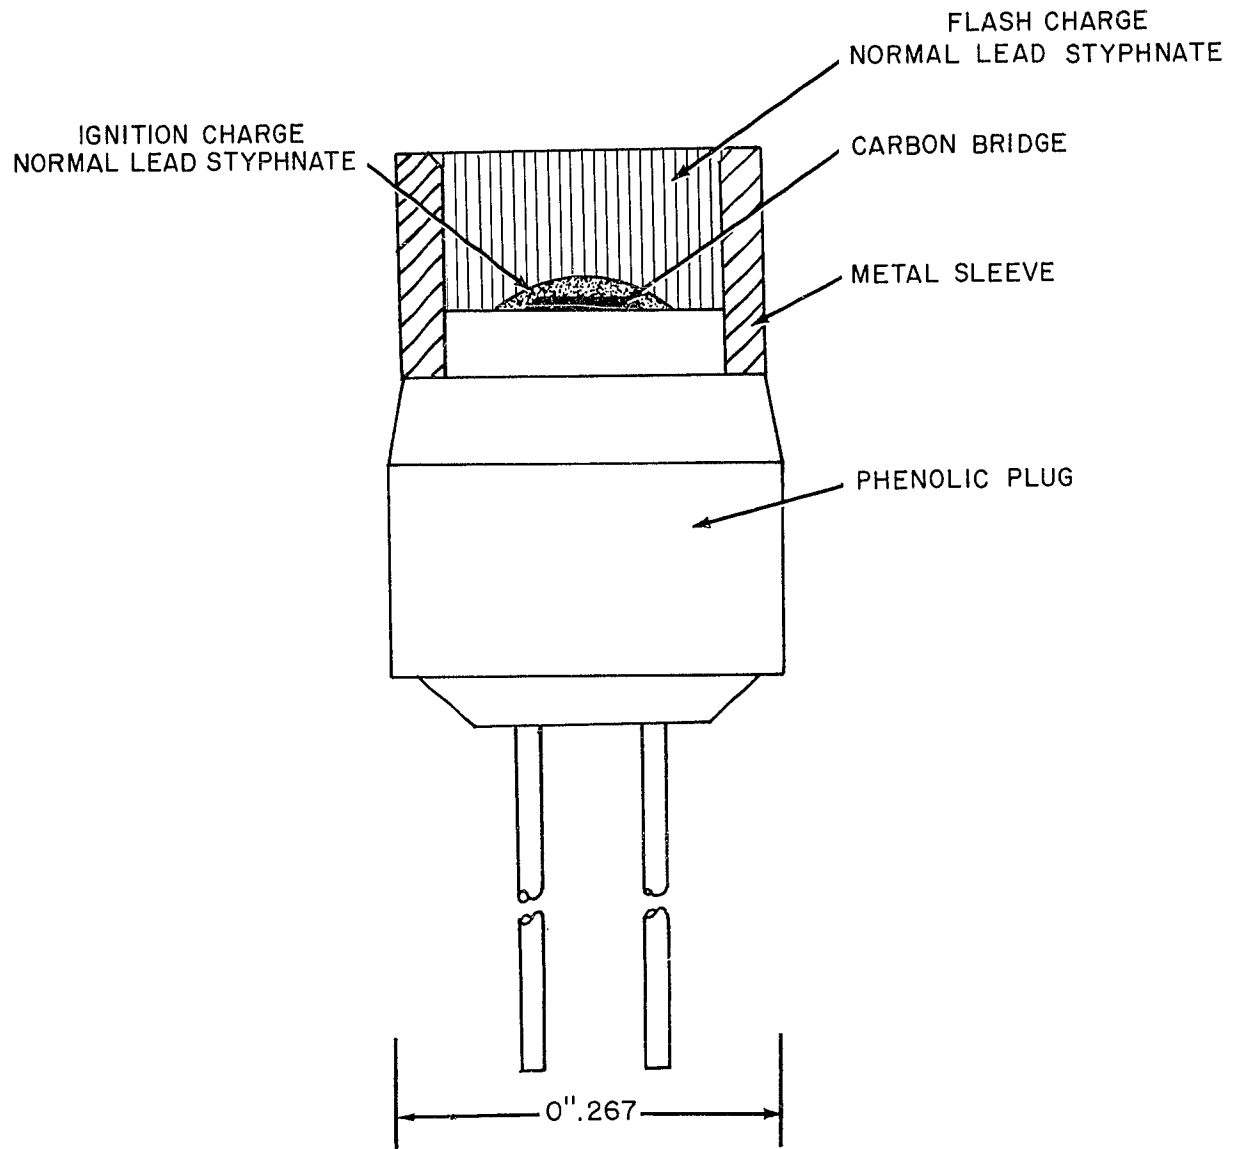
PRIMER MK121 MOD 0 IGNITION ASSEMBLY
